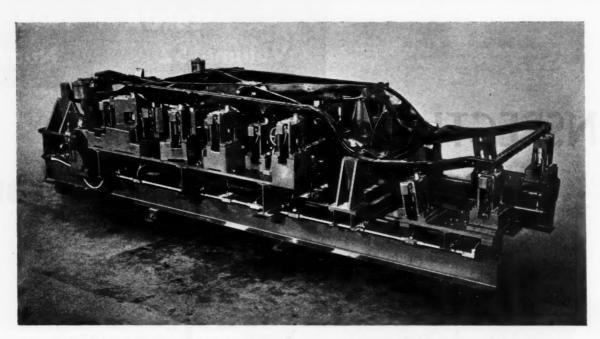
Inspection Fixture Developed for Checking All Important Dimensions on Automobile Frames, so that Bodies can now be Doweled to These Frames. Buick Automobile Frames are Checked 100 Per Cent in Fixtures of This Type
